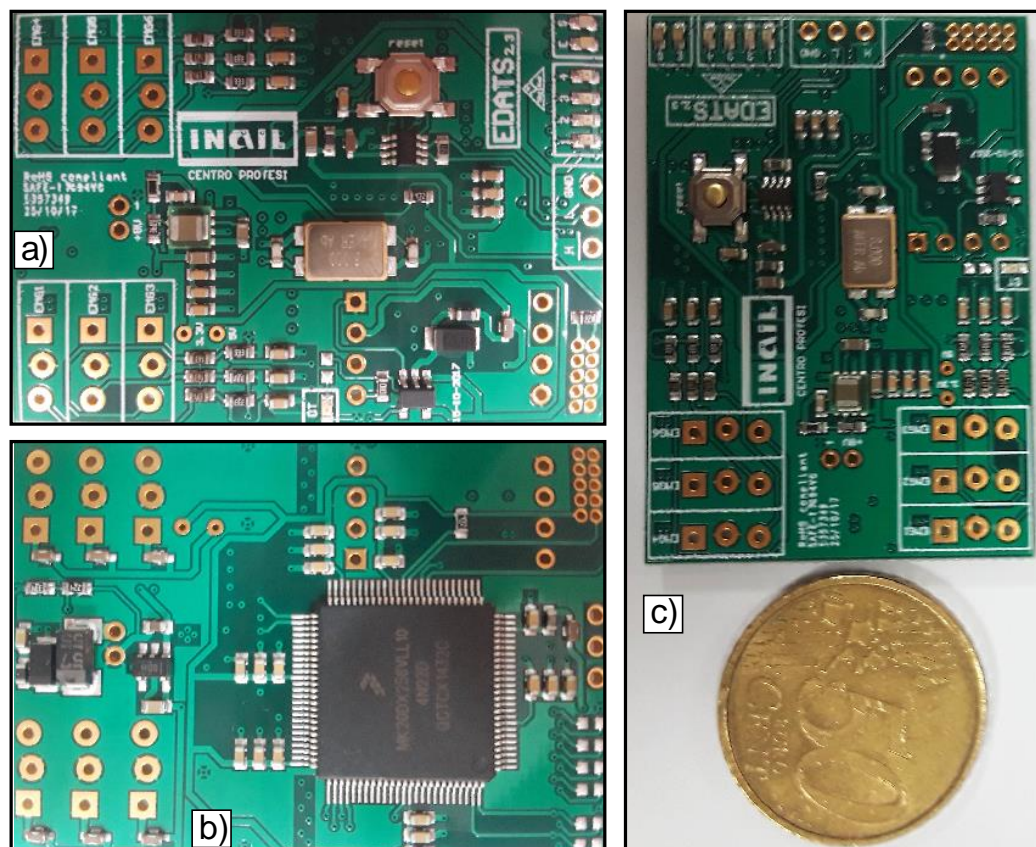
Pattern recognition control unit PCB; a) Top view; b) Bottom view; c) Overall sizing placing the PCB near a 0.5€ coin.
